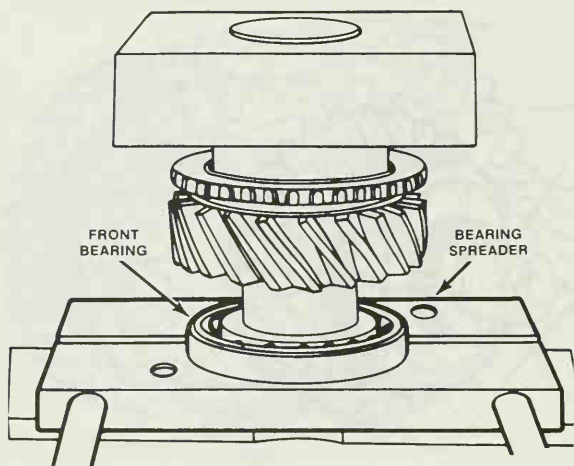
Pressing on the front bearing. (American Motors Corporation)
